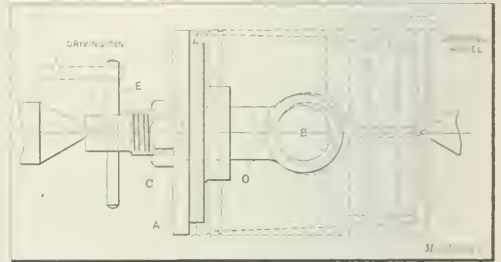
Method of holding Gas Engine Piston for External Grinding
